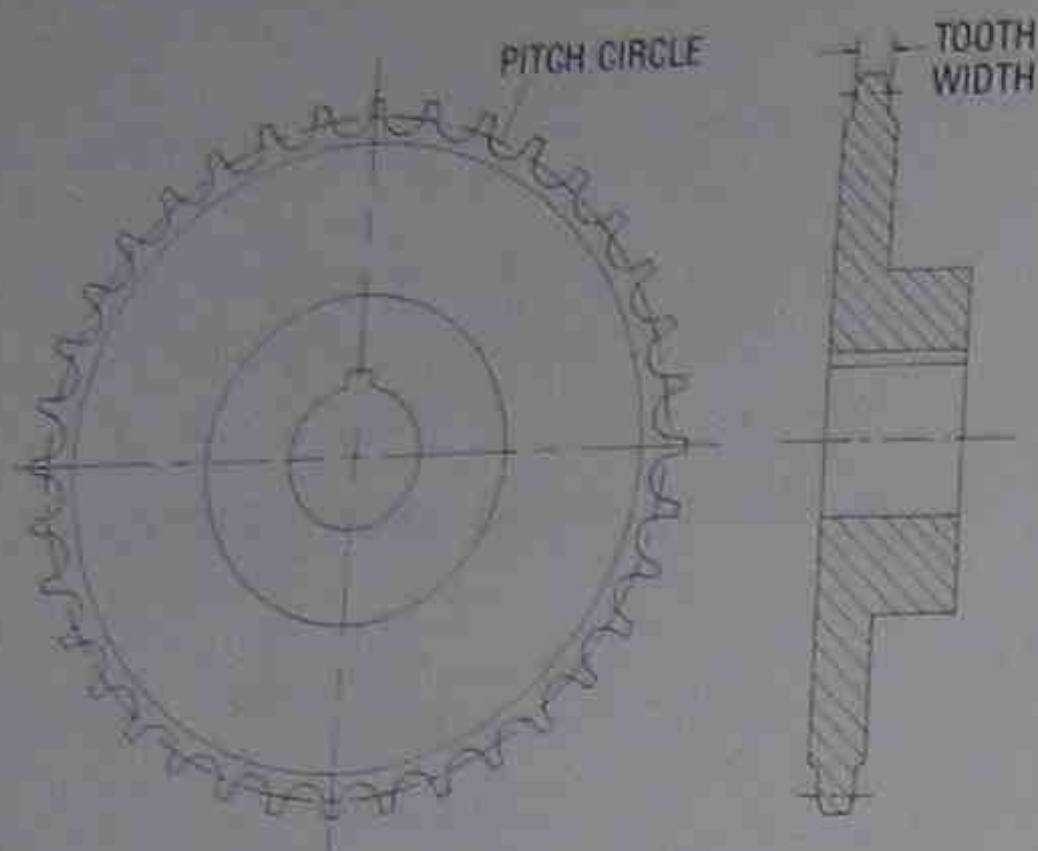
Chain drive sprockets are usually manufactured with an integral hub.
